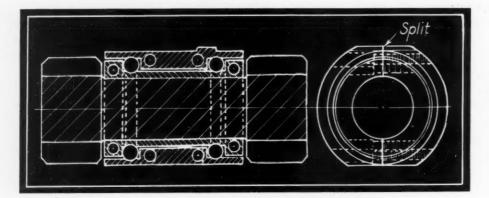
Sketch of double row sleeve cartridge type bearing mounting utilizing split races
